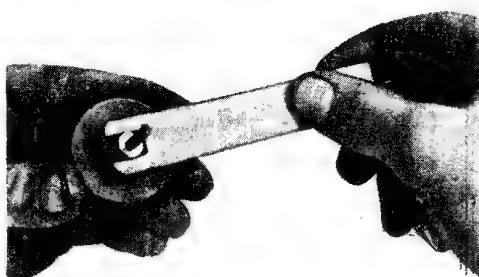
With a specially made thin screw spanner the tightening nut is screwed up to hold the spindle in the knob
